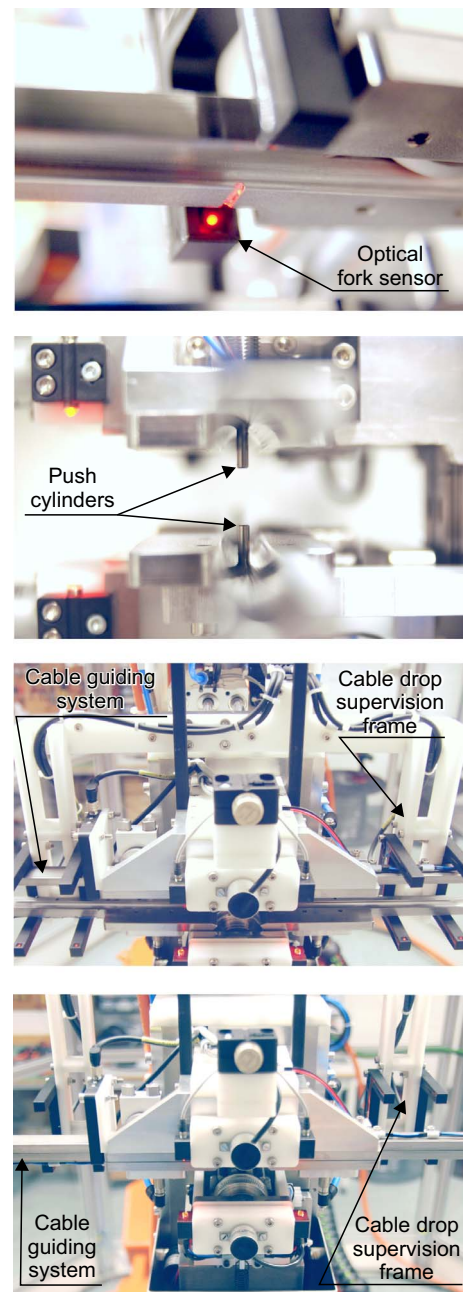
(a) The optical fork sensor used to detect cable inside the guiding system of a robot cable feeder tool. (b) The micro pneumatic push cylinders pushed out, as seen from the cable guiding system end of a robot cable feeder tool. (c) The cable drop supervision frame pushed out over the cable guiding system of a robot cable feeder tool. (d) The cable drop supervision frame retracted from the cable guiding system of a robot cable feeder tool.
